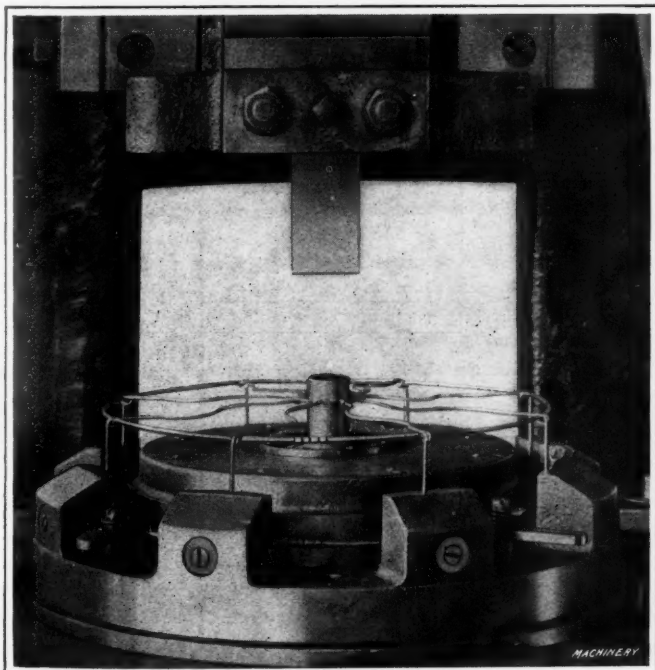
Tools for assembling Rear Rim Wire and Arms
